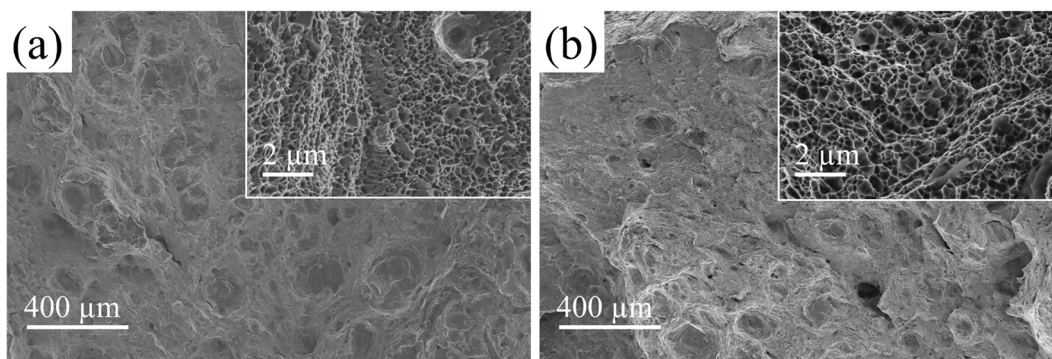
Comparison of low-cycle fatigue fracture dimples: (a) fatigue specimen A-01; (b) fatigue specimen B-01.
